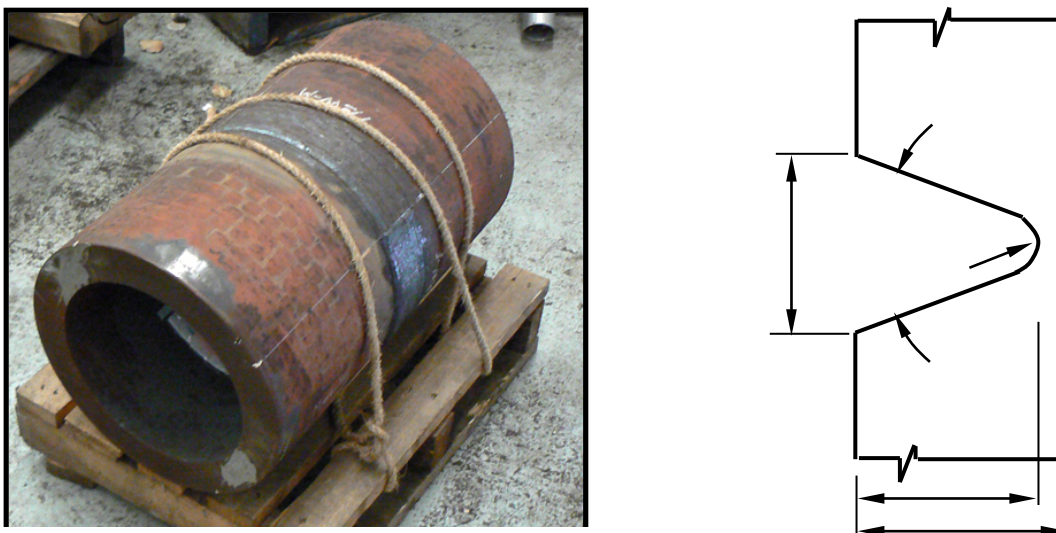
Sample of P22 pipe after welding and sketch showing the weld preparation.
